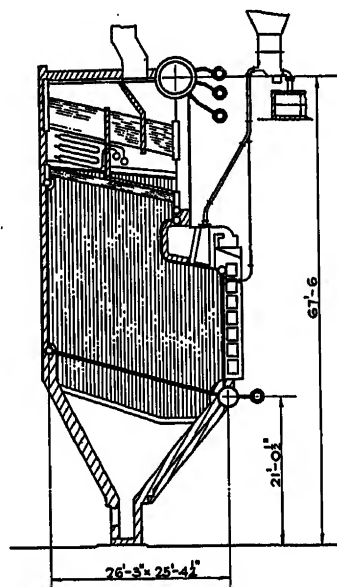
CROSS-SECTION OLD BOILER UNITS
